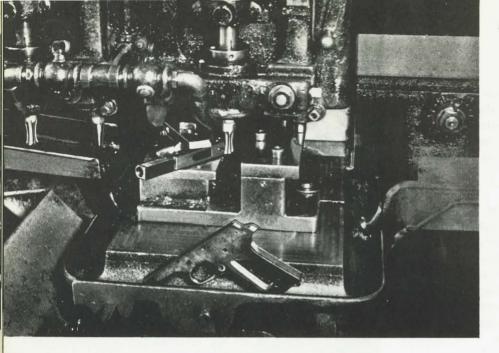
Profile Milling the Contour around the Hammer Guard of the Receiver. A Receiver with Finished Hammer-guard Profile is Shown at the Front of the Machine
